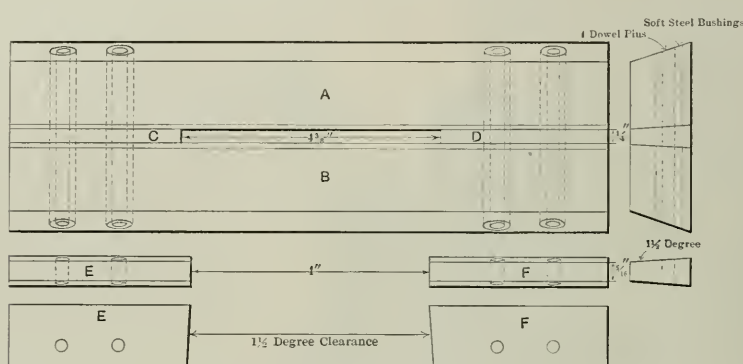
Die with Interchangeable Parts, permitting Two Sizes of Blanks to be Punched by Changing the Center Pieces only.
